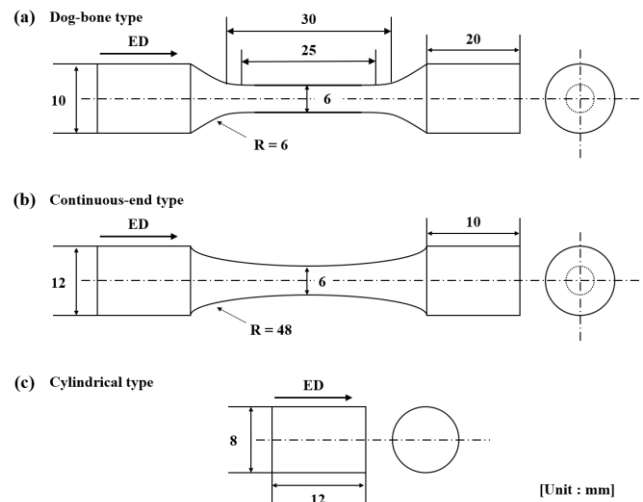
Schematic drawing of mechanical test specimens: (a) tensile, (b) high-cycle, and (c) compressive test specimens. ED denotes the extrusion direction.
